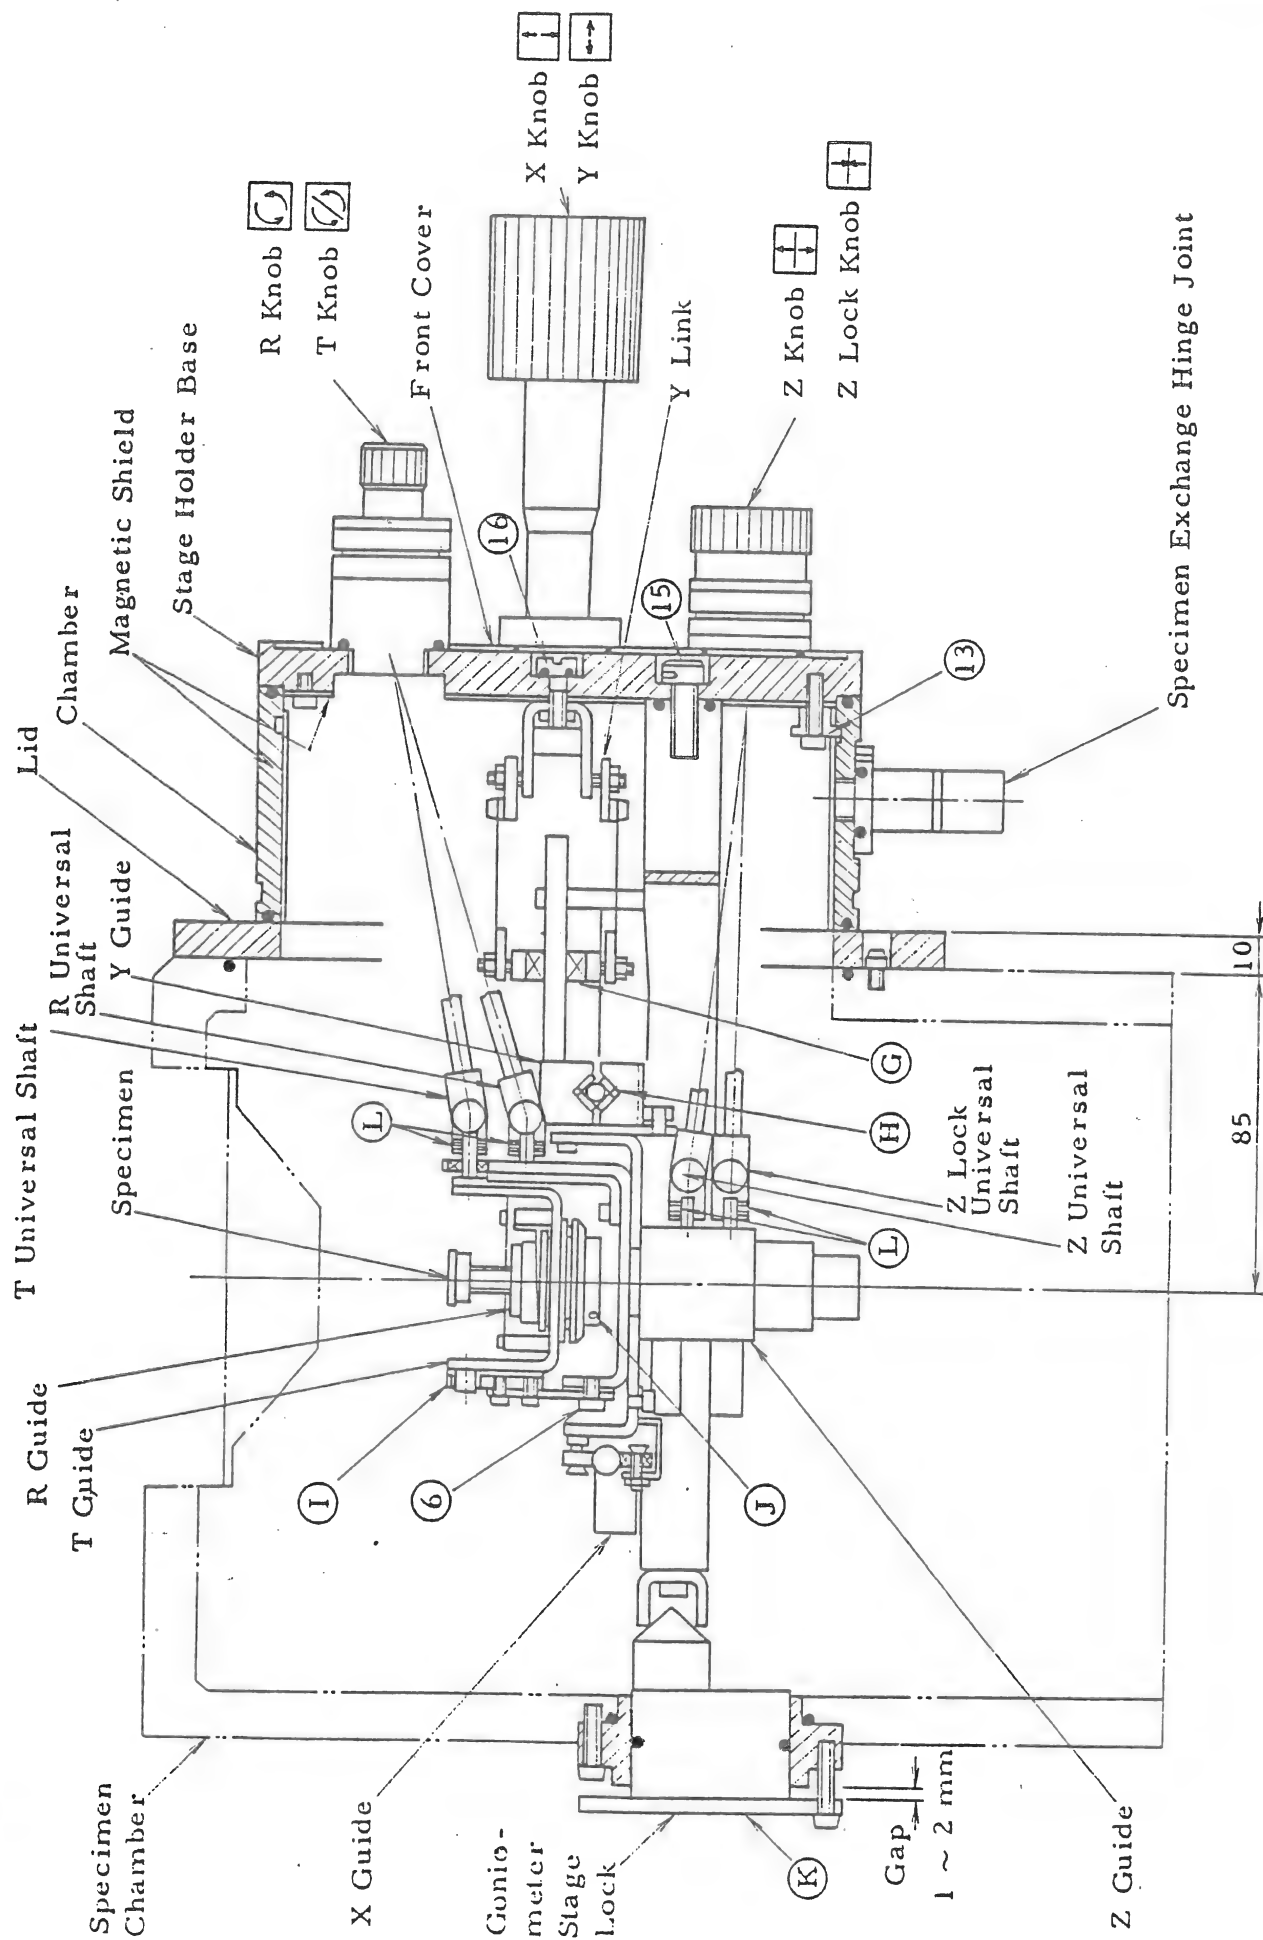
Sectional View of Specimen Goniometer Stage
